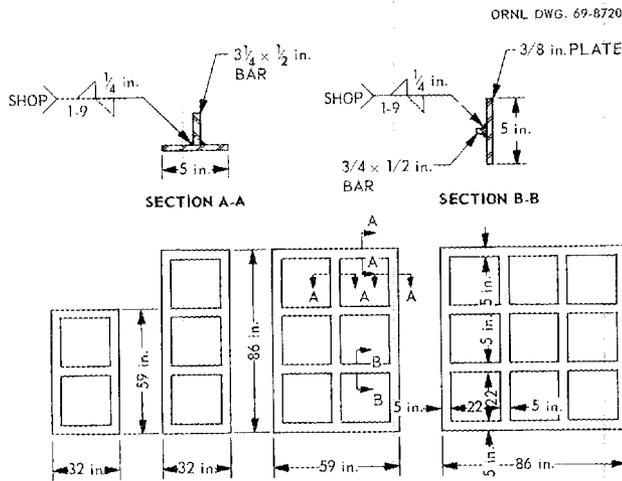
Mounting frame made from a single plate. Module dimensions and details for reinforcing bars.
